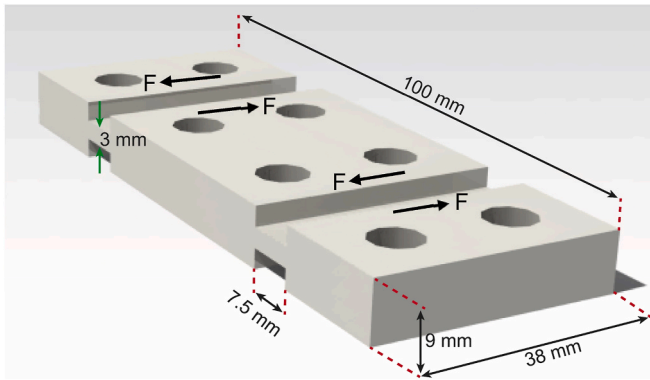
Geometrical characteristics and dimensions of the specimen in shear test.
